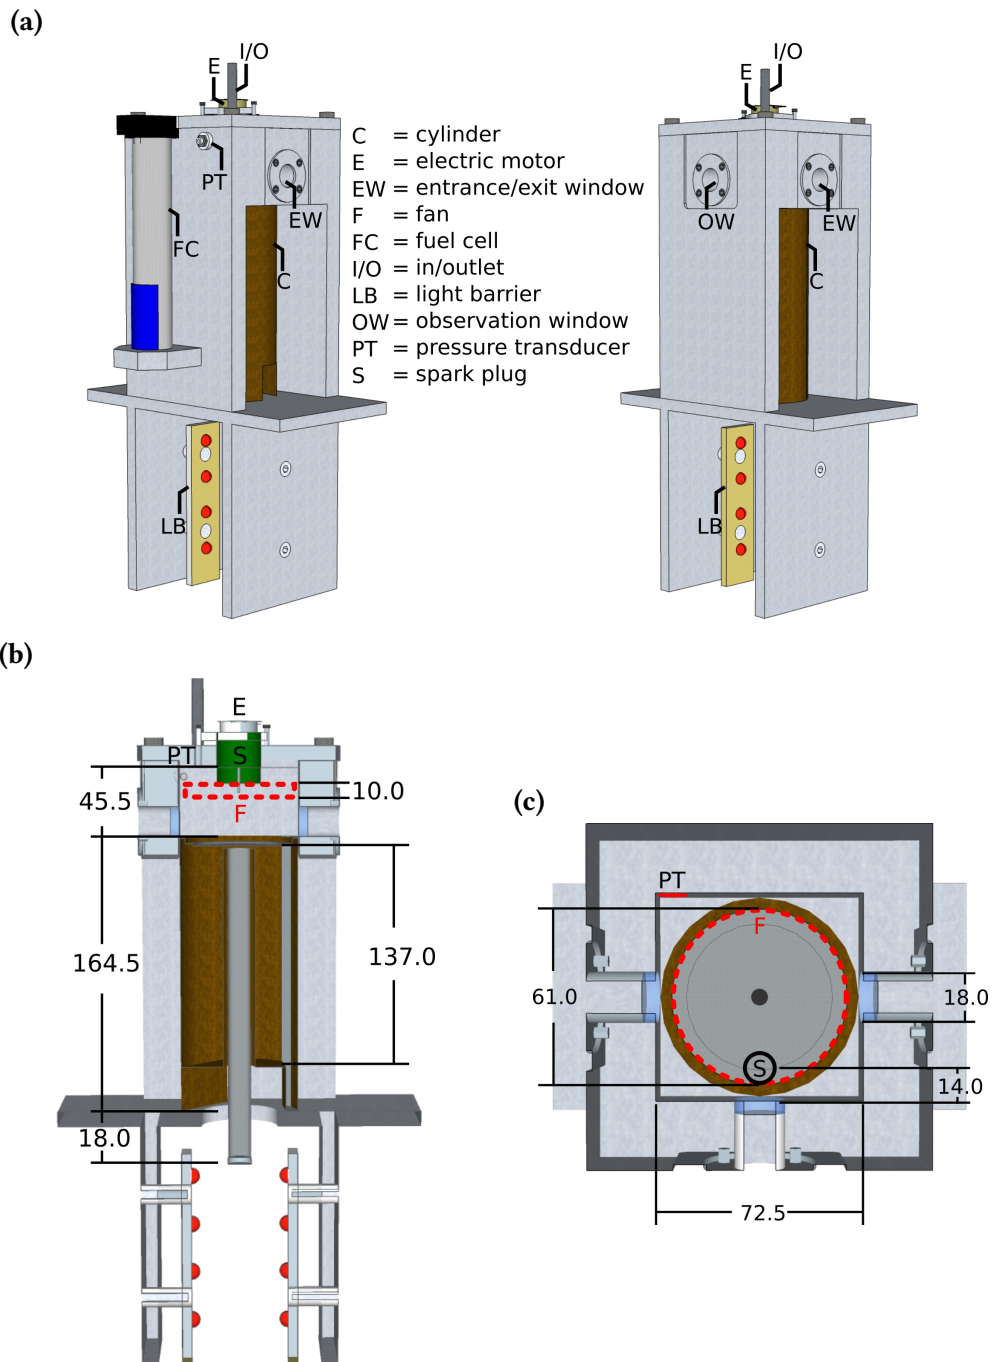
Schematic drawings of the combustion chamber. The fuel can be injected using external cartridges (fuel cells, FC) or the chamber is filled with premixed fuel-air compositions using the in-/outlet pipes. (a) Back and front view of the chamber and observation windows centered in the cylinder head. (b) Vertical cut through the chamber. (c) Horizontal cut through the cylinder head. All dimensions are given in mm. The position of the fan is marked by the dashed red line, the spark plug position is represented by the black circle.
